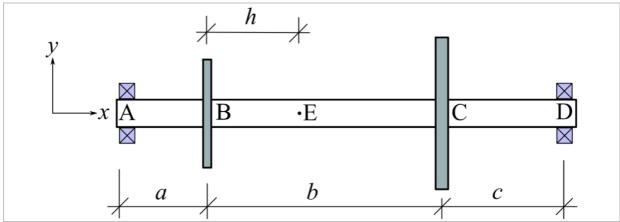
Plan view of the power shaft, showing the location of bearings A and D, pulleys B and C, and the possible location of a new bearing at E.
